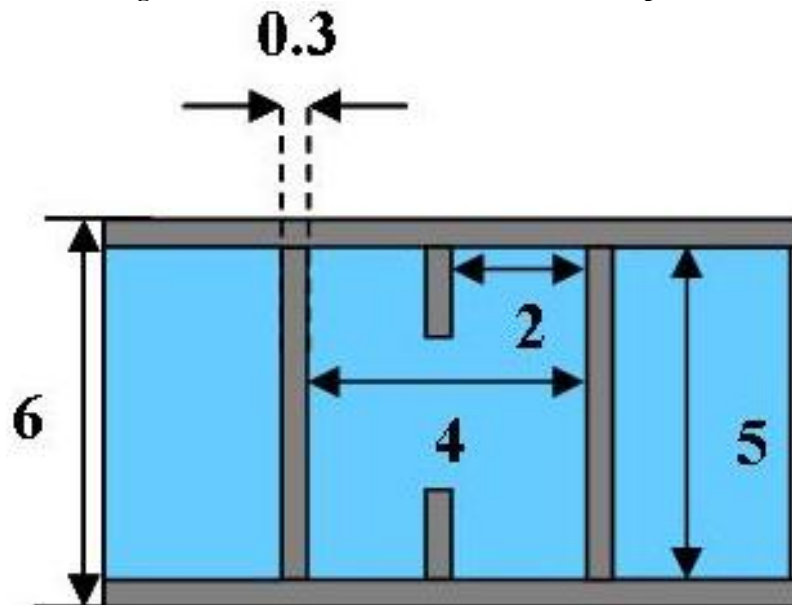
Cross-sectional view of the cold plate showing channel geometry
